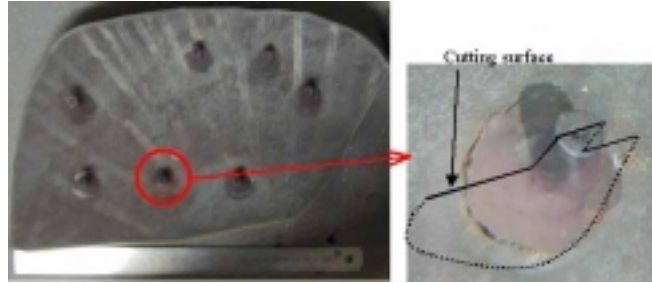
Inner surface of LHF-4 tested vessel and cutting direction for observing cross-section area
